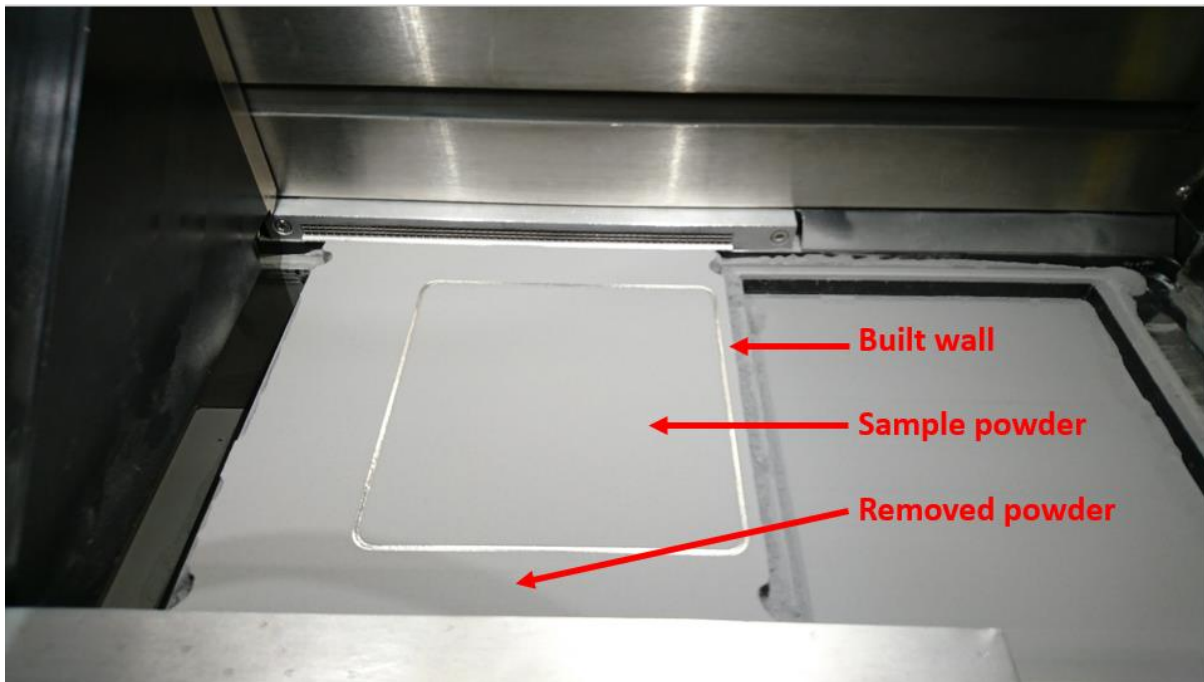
View into building chamber after a job is completed. The building platform is elevated for clean-up and removal.
